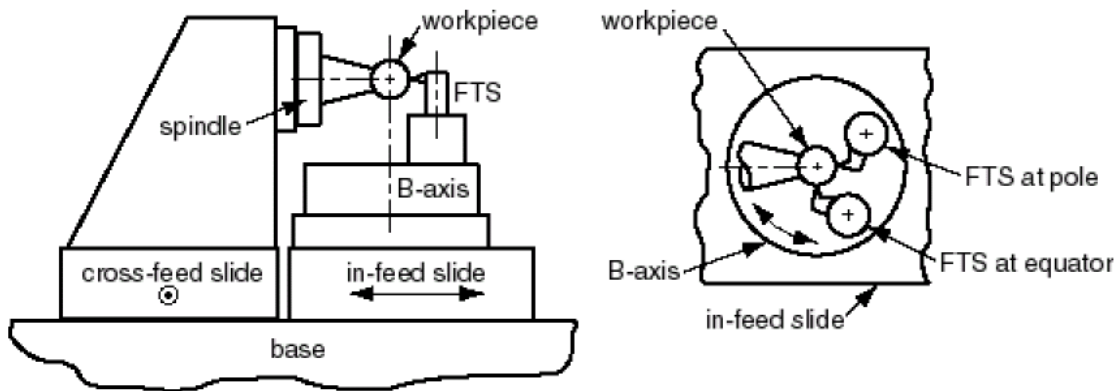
An example of a rotary fast tool servo set up for operation on a two-axis lathe. Side view (left). A top view (right) shows the servo’s ability to engage the workpiece at its pole and equator by rotation about the B-axis.
